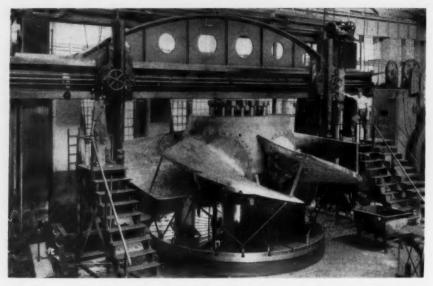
Overall view of machining setup for turbine runner shows the 165-ton workpiece being machined, with the turntable moving at 2.1 revolutions per minute.
